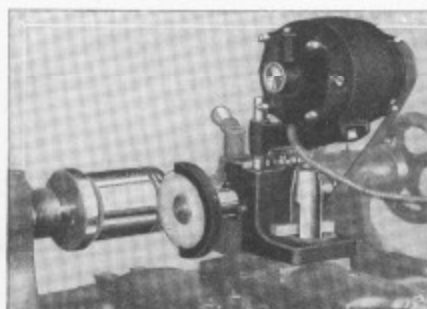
Finishing a Semi-Machined Piston by Grinding in the Lathe.
